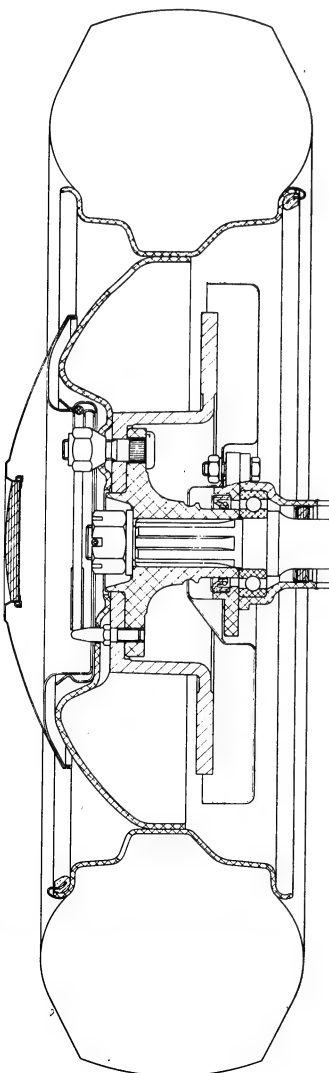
Sectional view of a rear wheel across hub and brake disc (1600 S Cabriolet).
